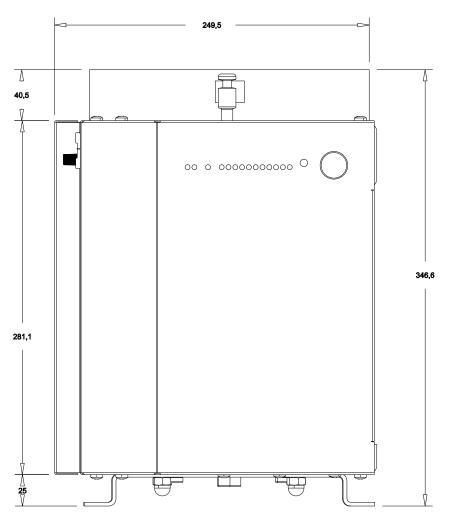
Device dimensions from front. All dimensions in millimeters.
